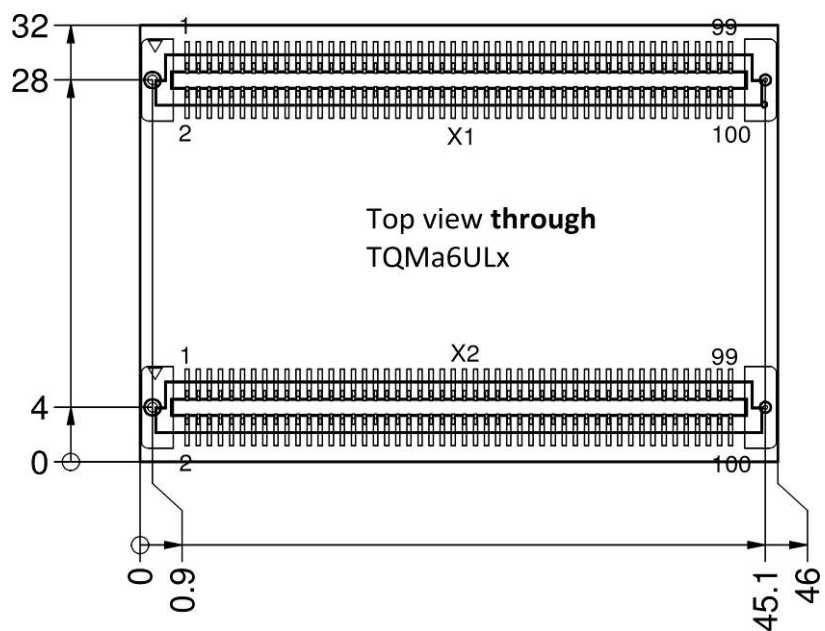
TQMa6ULx dimensions, top view through TQMa6ULx
